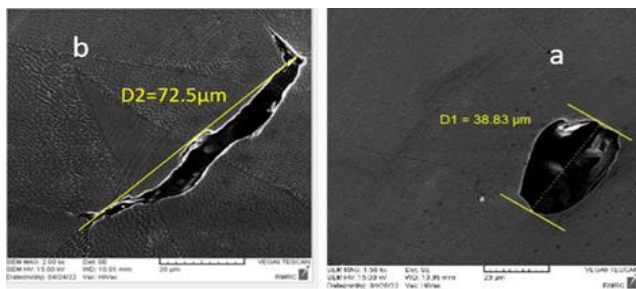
The fracture zone of the large tensile test specimen, 90-degree building direction: a) Spherical hole; b) Incomplete fusion hole.
